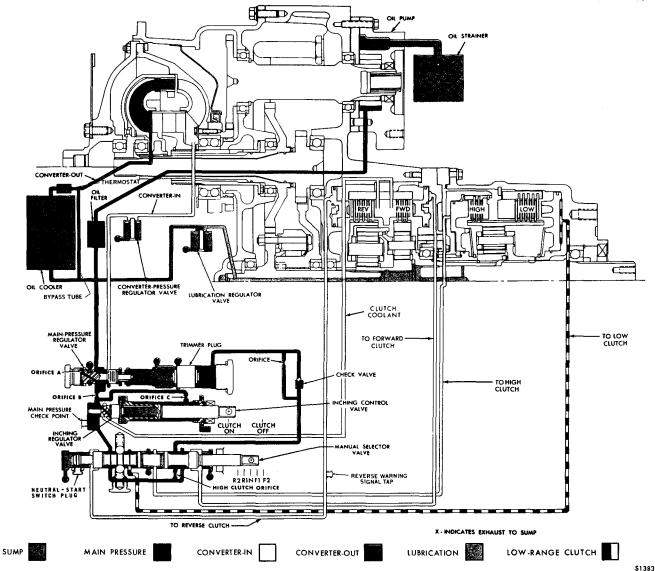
TRT 2221-3 hydraulic system for underdrive model with inching control—schematic view
